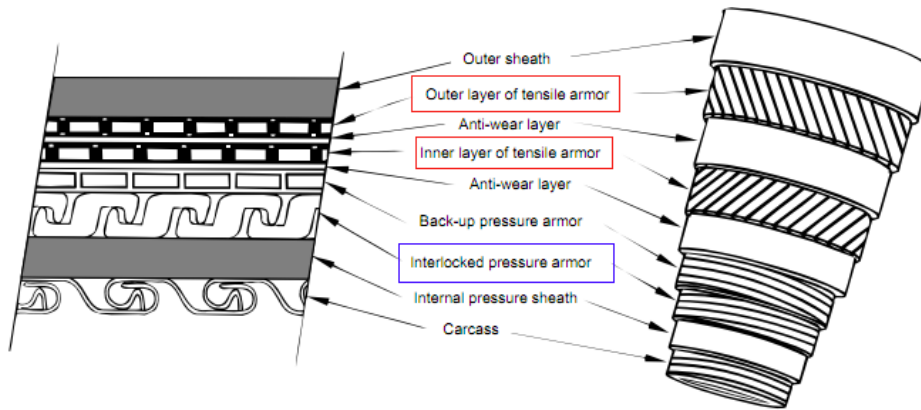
Cross section of unbounded flexible pipe, (API, 2008)
